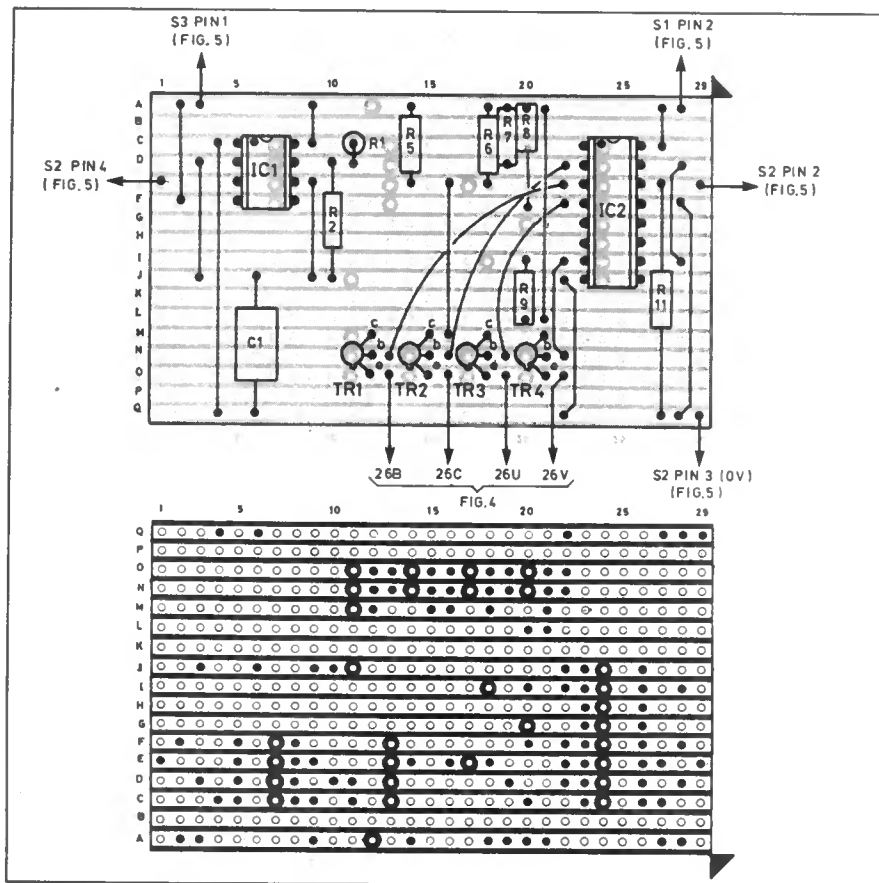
Topside component layout and underside stripboard track cuts and solder joints for the Clock Generator and Large Number counter board.
